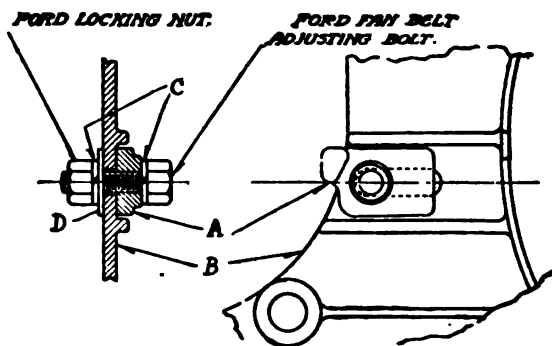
Correct assembly of belt tightener for Heinze-Springfield installation on Ford car
